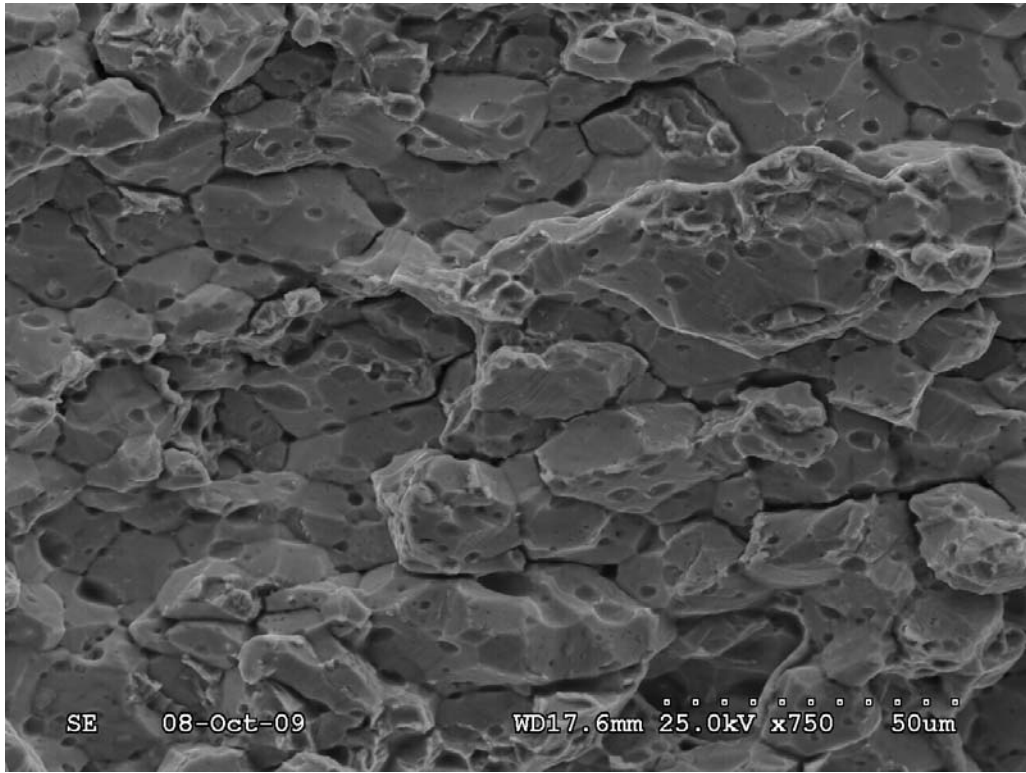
SEM image of fracture surface of October failure showing intergranular fracture.
